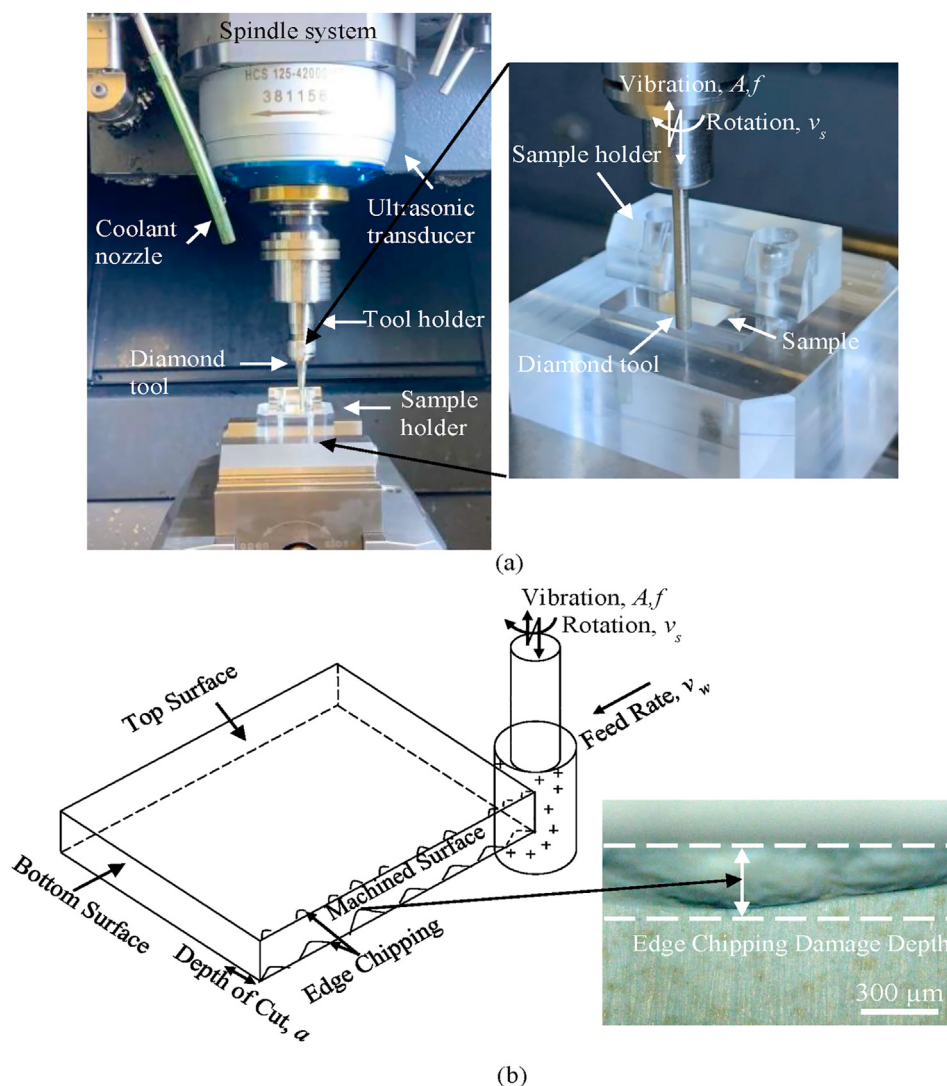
(a), Experimental setup for conventional and ultrasonic vibration-assisted diamond machining and (b), Sample-diamond tool movements for surface machining, machining-induced edge chipping damage on both top and bottom sample surfaces perpendicular to the machined surface, and edge chipping damage depth measurement.
